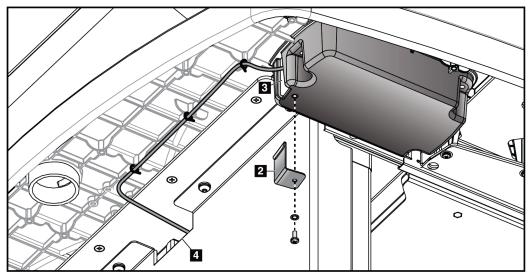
Routing/Removing cables of assembly housing under the workstation tabletop
